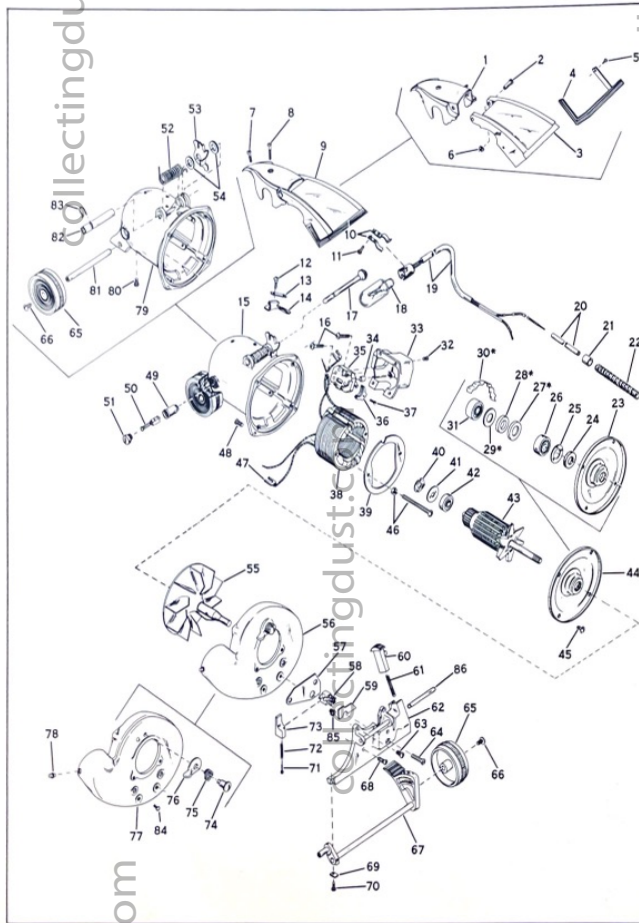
Motor group, exploded view. (Model 505 through 512)
